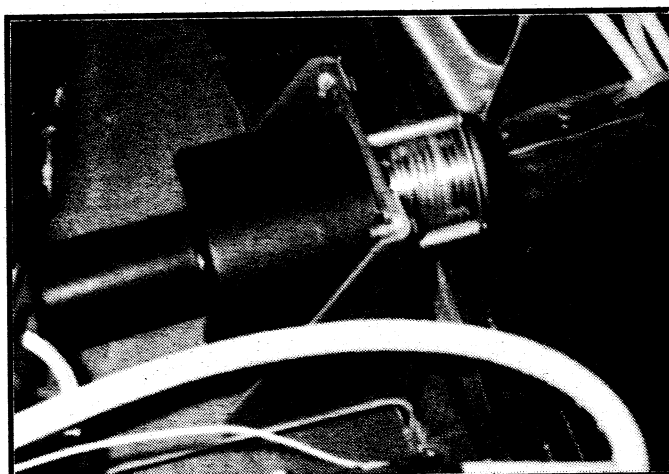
Showing the CBROS pitch servo mounted behind Blkhd 162
